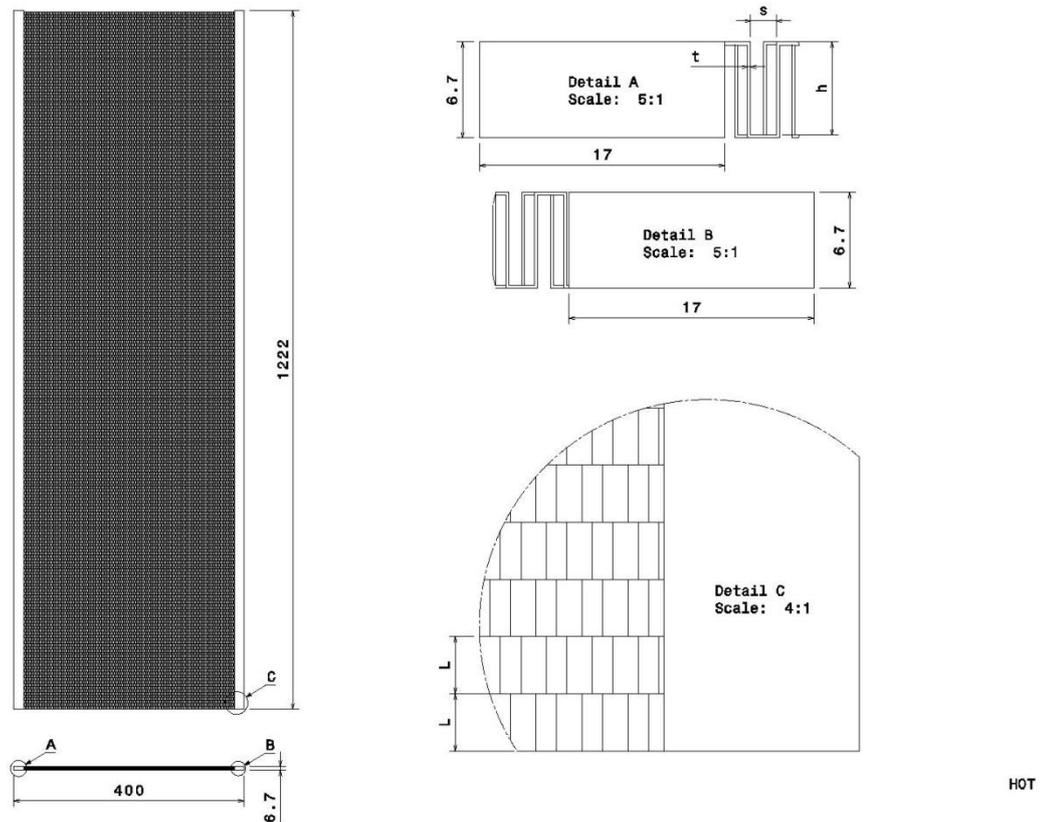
Assembly for both hot 1 and hot 2 stream
